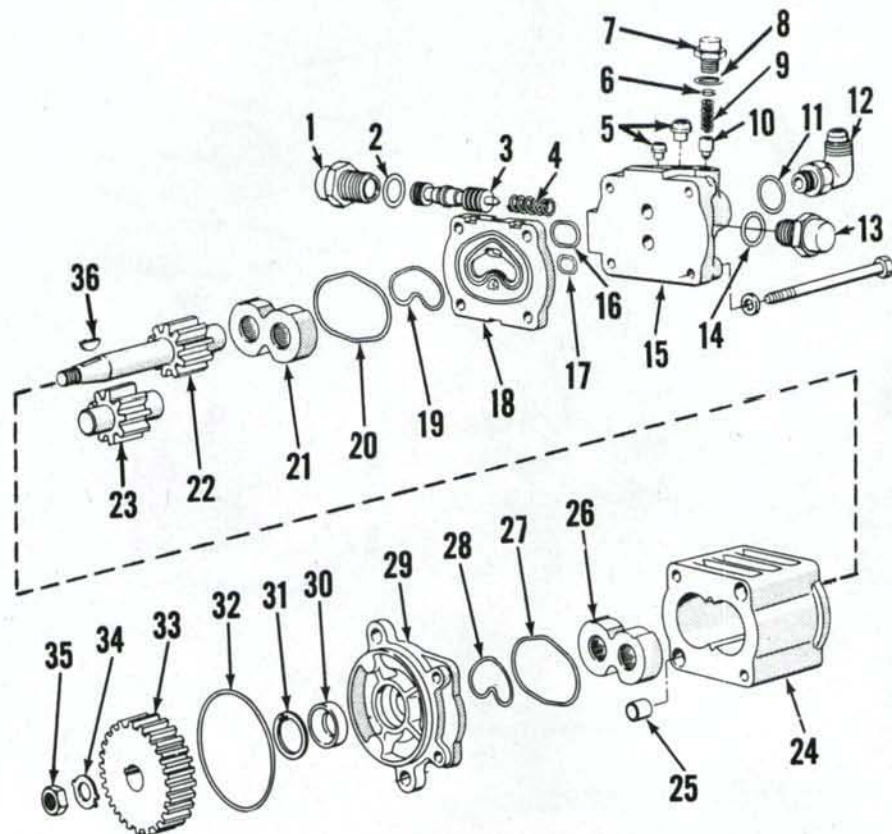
Exploded view of early power steering pump. Note that flow control valve spring (4) and small tip end of valve (3) is towards side of rear cover (15) containing the relief valve assembly (Items 6 through 10). Refer to Fig. 9 for model 4200 shaft seals.
